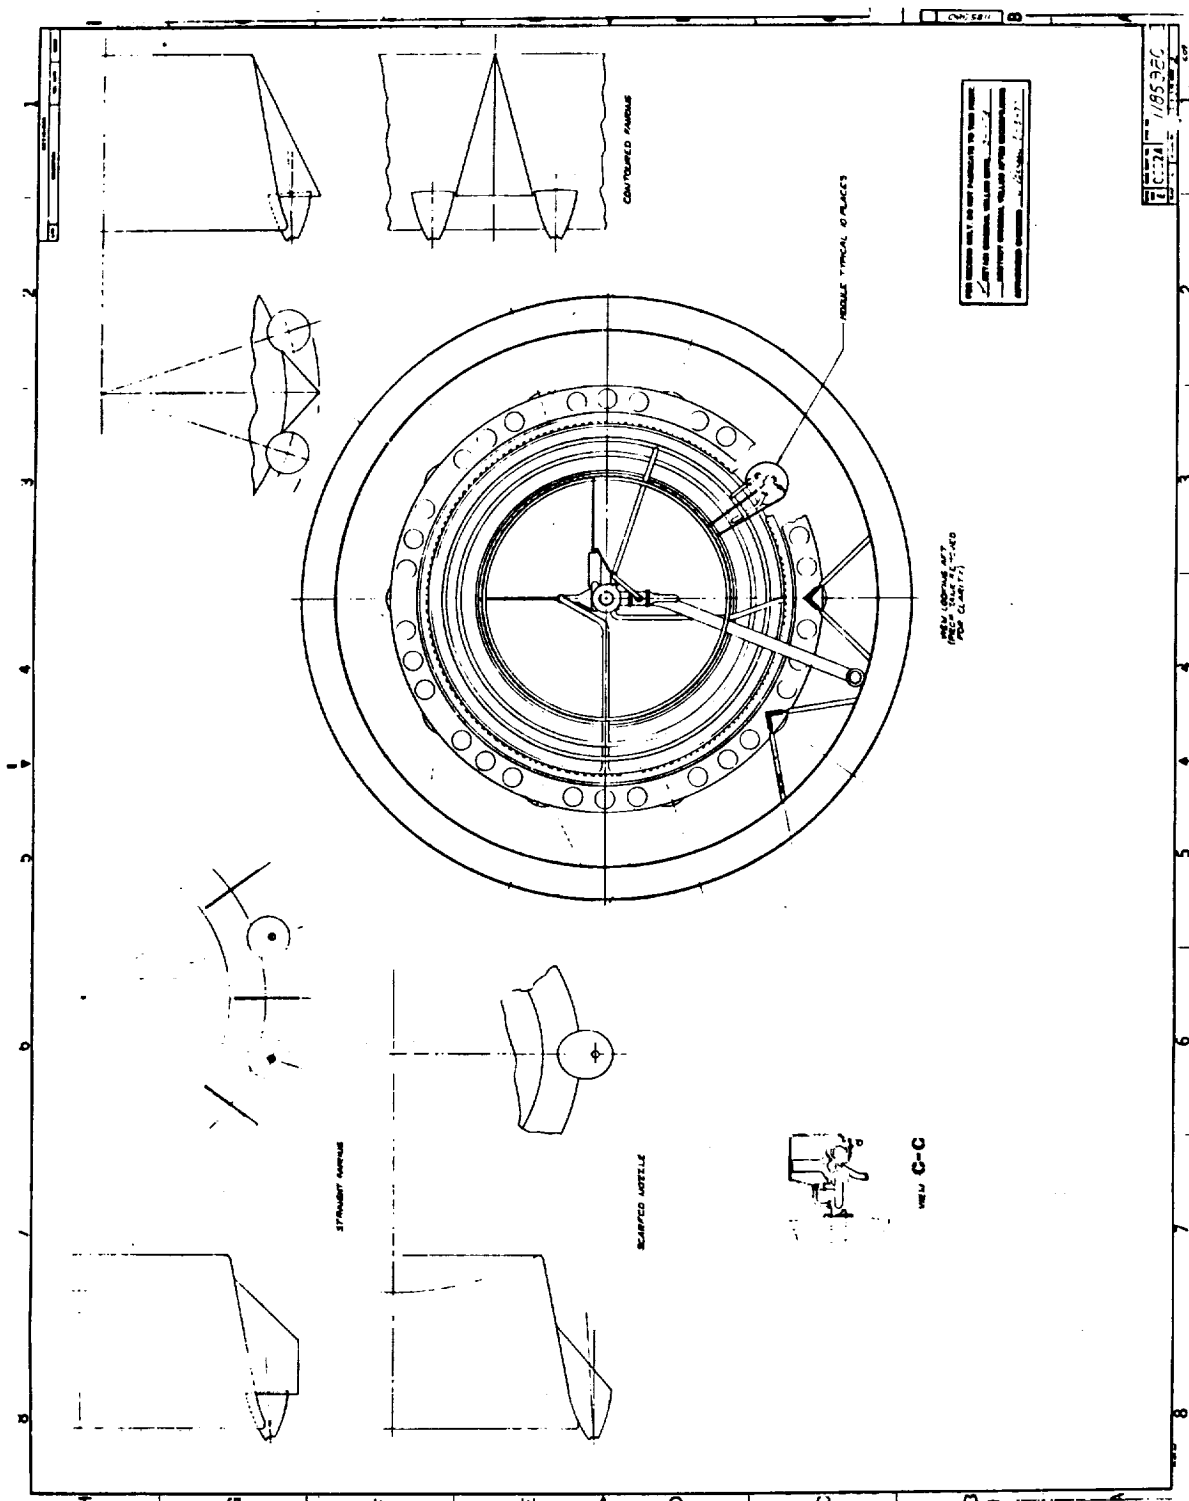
Regen-Cooled 40:1 Module Plug Cluster Engine Configuration GG03, Dwg No. 1185980 (Sheet 2 of 2)
